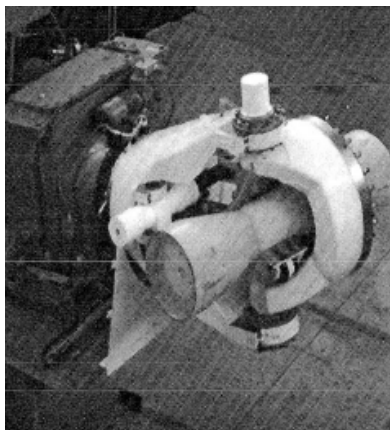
Hub assembly of the Monopteros M30 machine showing foam filled inner blade structure [30].
